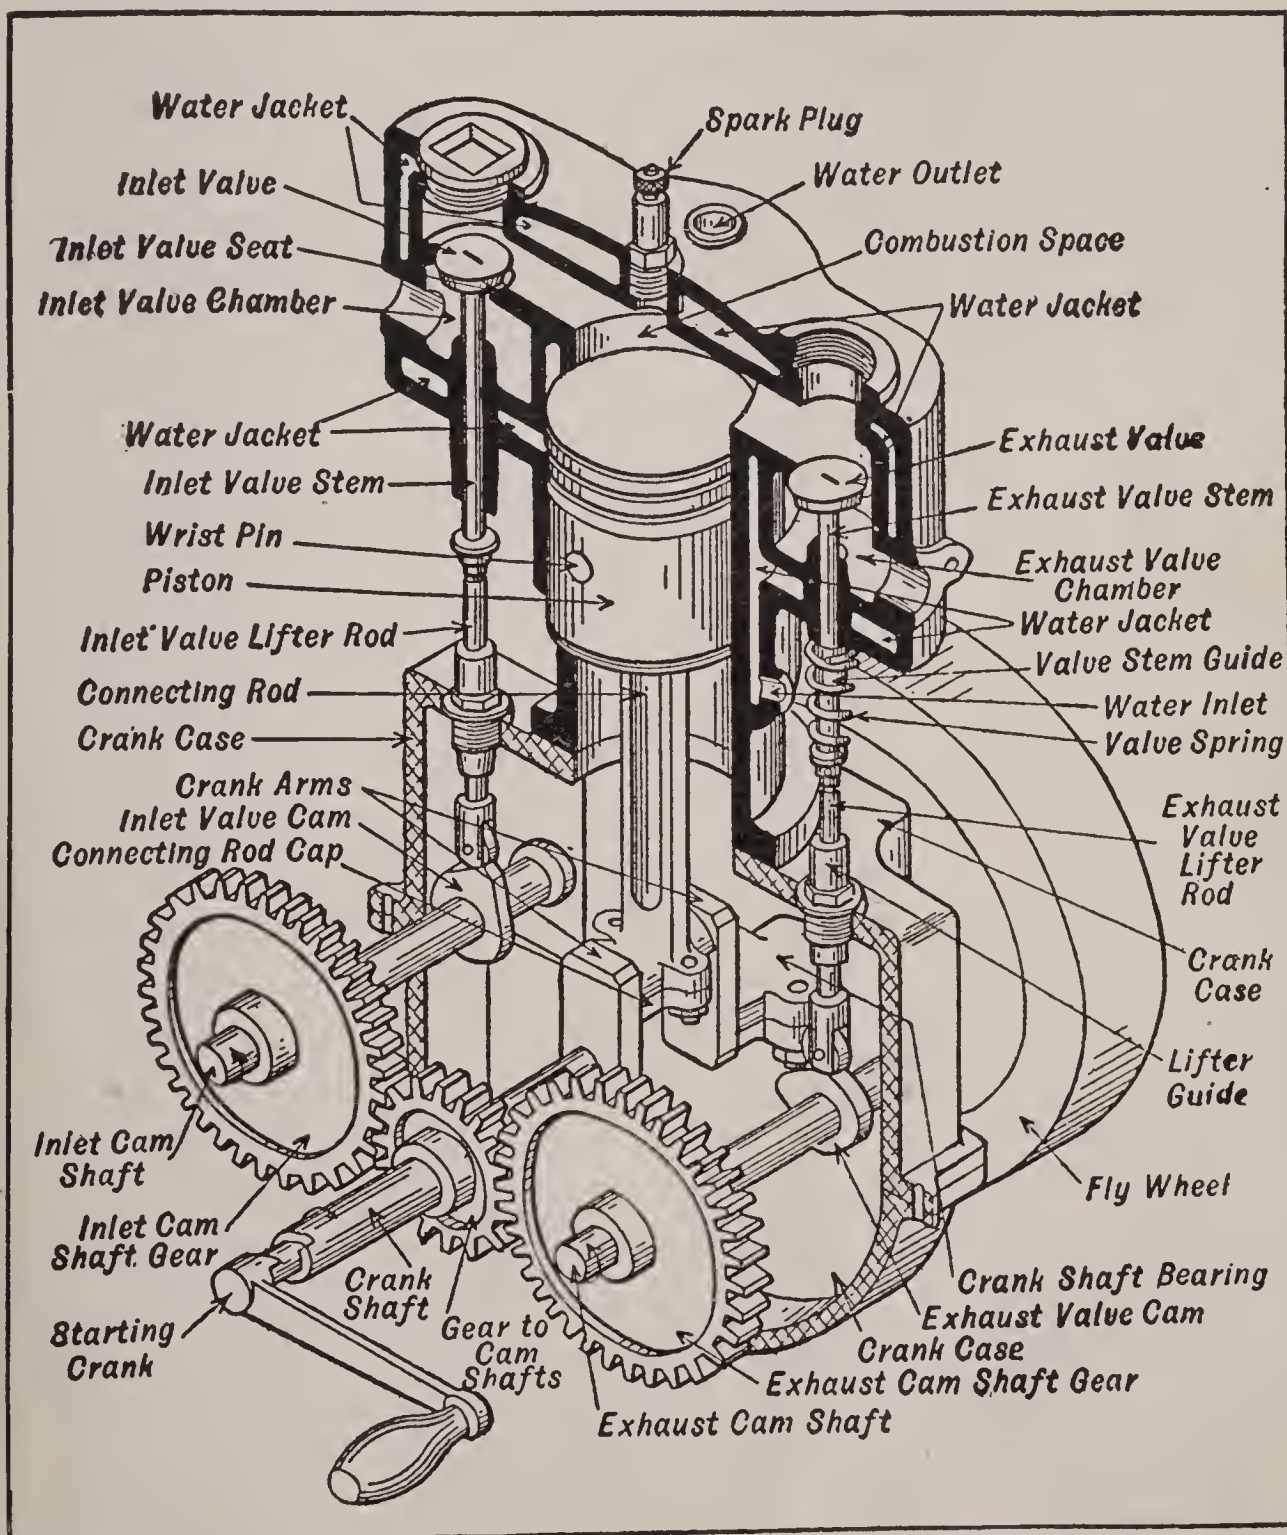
Diagram Showing Principal Parts of Single Cylinder Water-Cooled T Head Power Plant.
